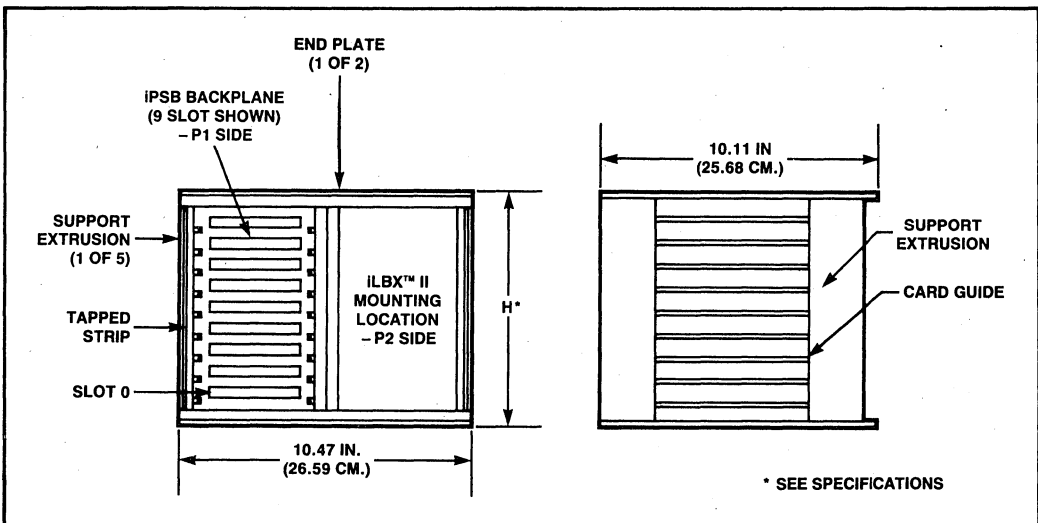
Cardcage Assembly Dimensions (iSBC® PKG/609 shown)
